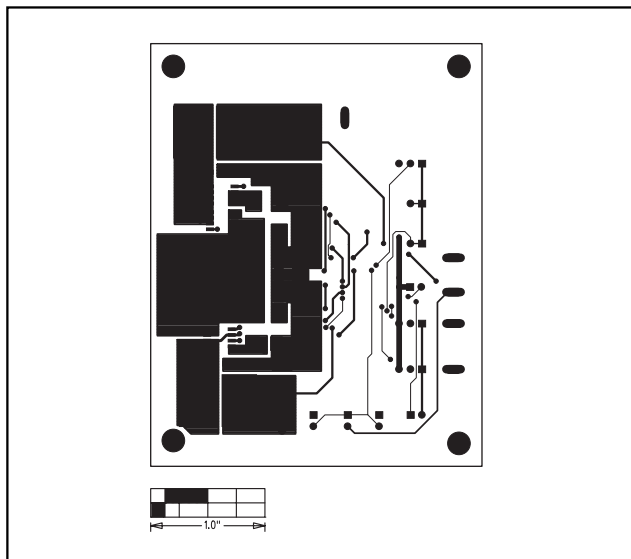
MAX1845 EV Kit PC Board Layout—Component Side
